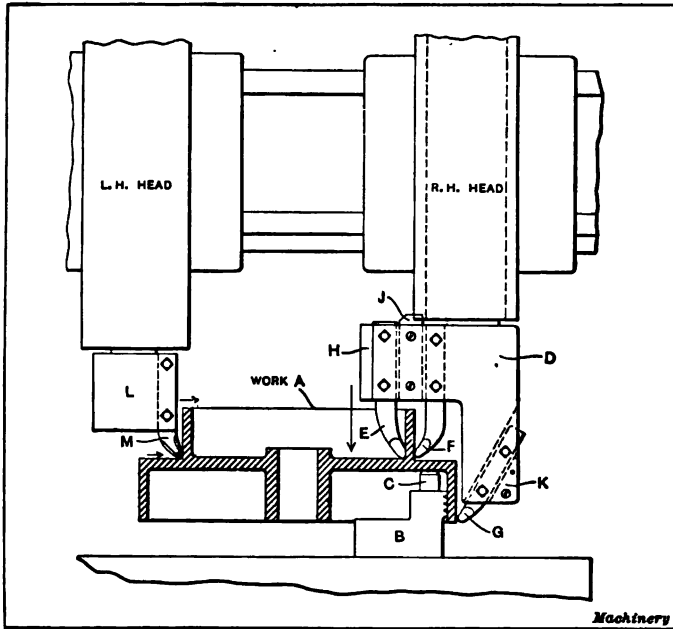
Application of Multiple Turning Tool to Vertical Boring Mill
